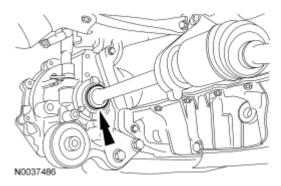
Locating RH Halfshaft Courtesy of FORD MOTOR CO.
